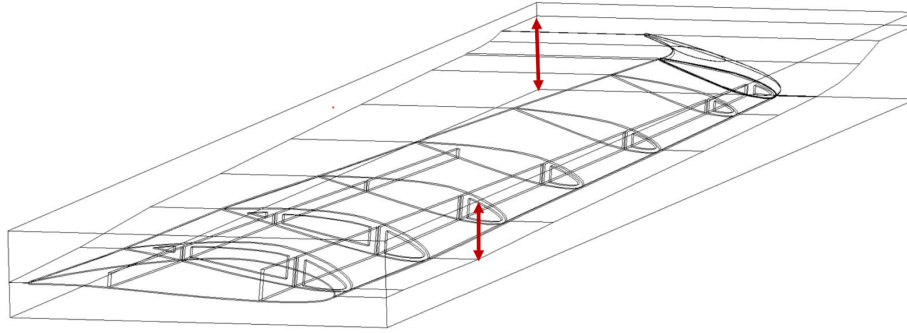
Isometric View of Bellwether’s Non-linear Outboard Wing Mold
